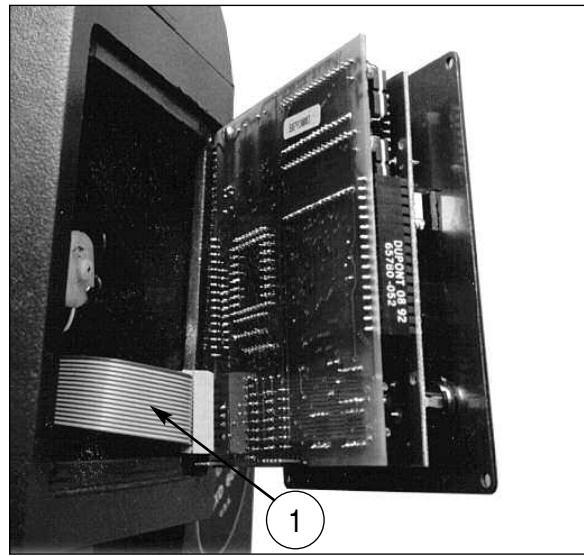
CDS PCD. (1) 16-Pin Ribbon Cable.
